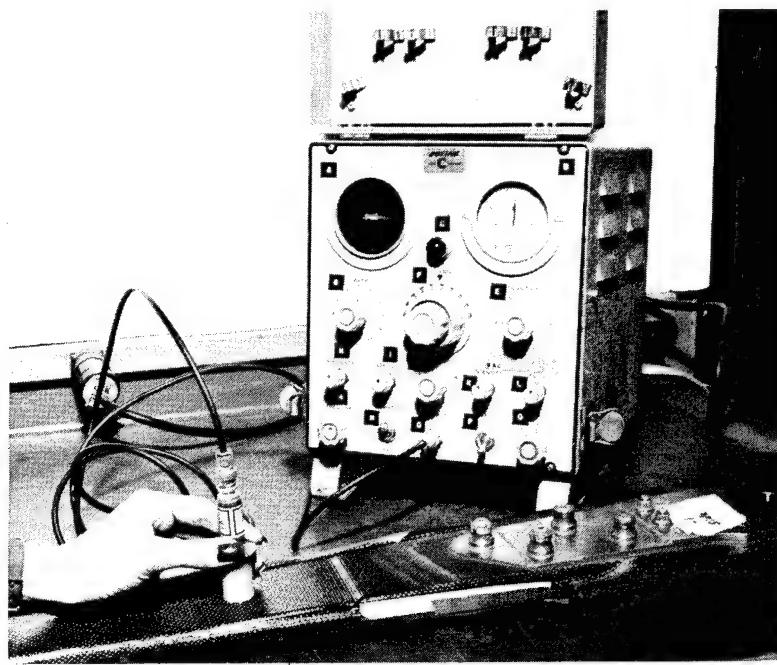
Fokker Bond Testing of Rear-Spar Assembly
